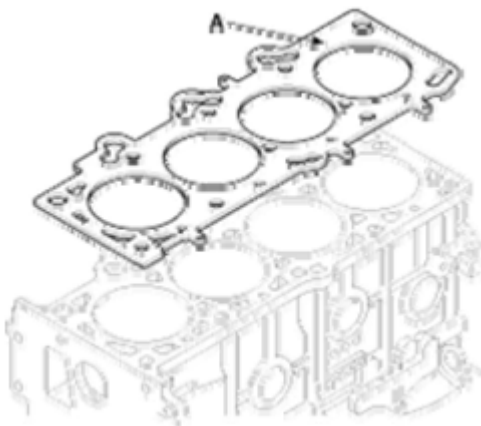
Installing Cylinder Head Gasket On Cylinder Block
